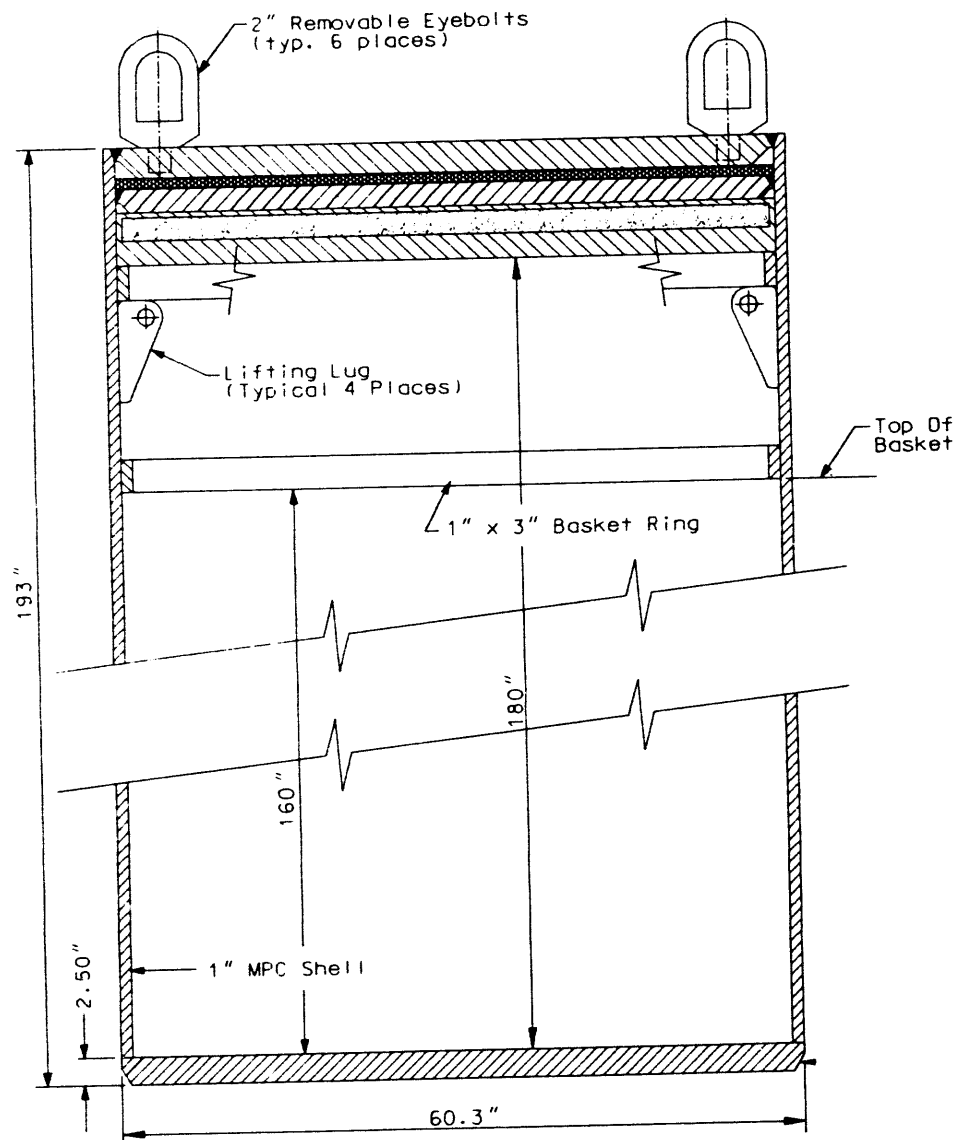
Large 21 PWR MPC (Side Section View)
